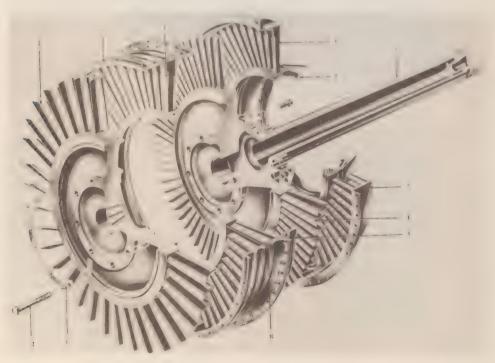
The turbine assembly of the Westinghouse J34 turbojet engine.
